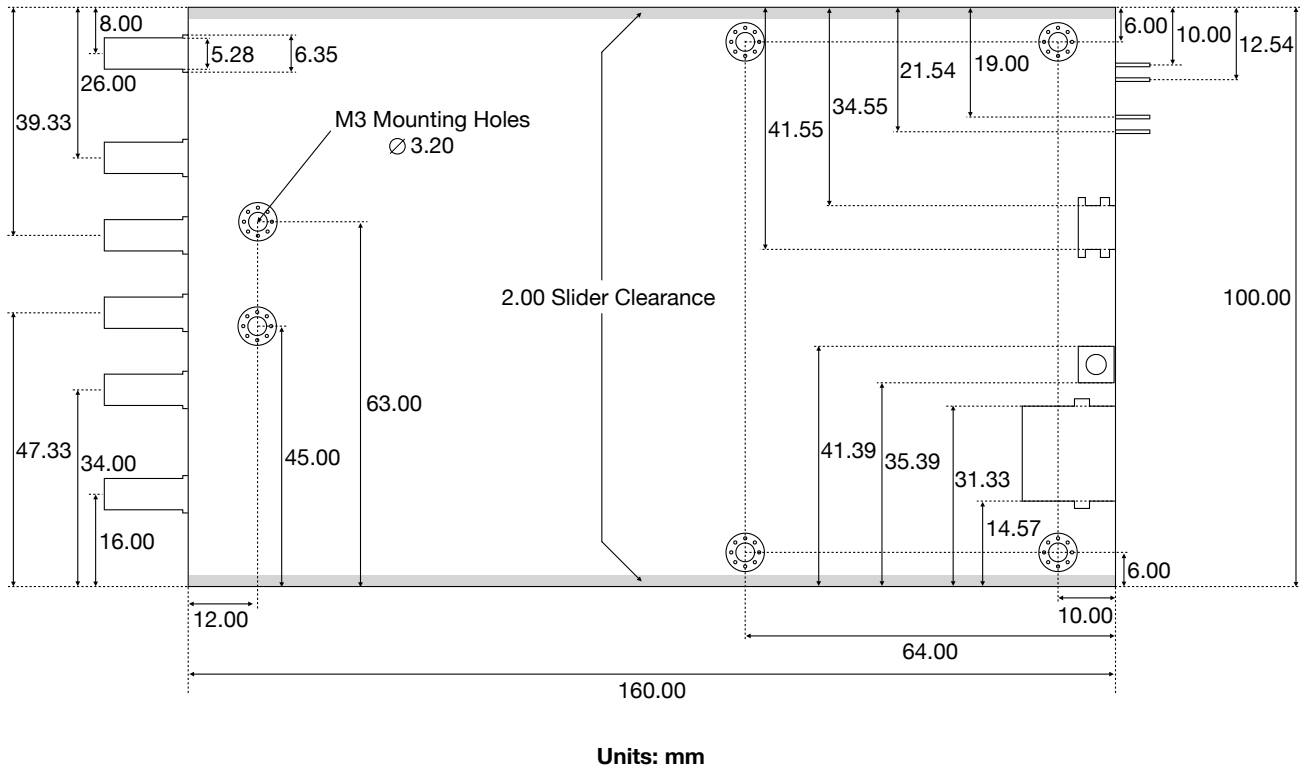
Dimensions of the Fully Assembled DDS Board (Including the Control Board).
